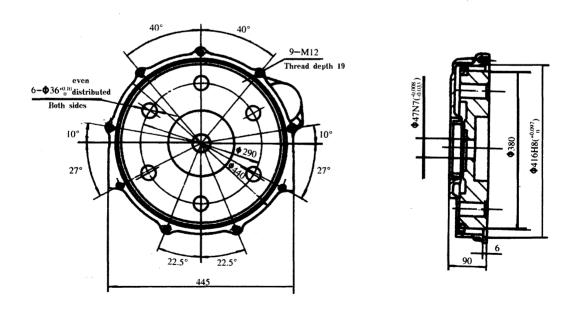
Outline drawing for 495G1, 495G9, K4100G1 diesel engine
